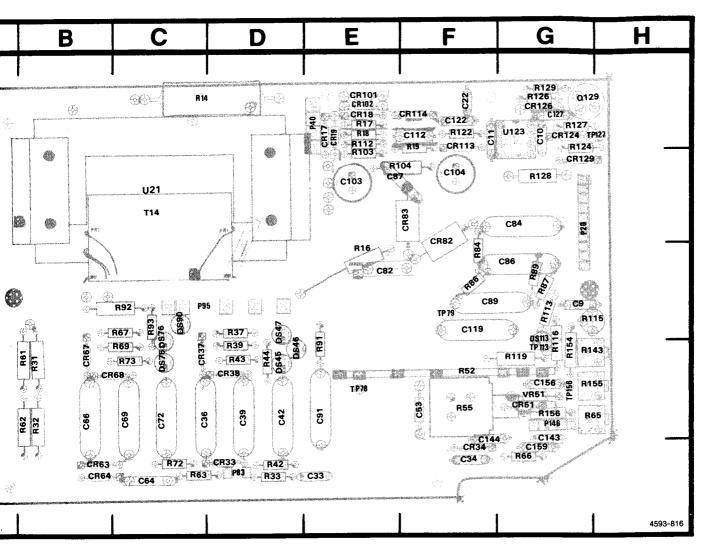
B. A20—High Voltage circuit board assembly (SN B021129 & below).
